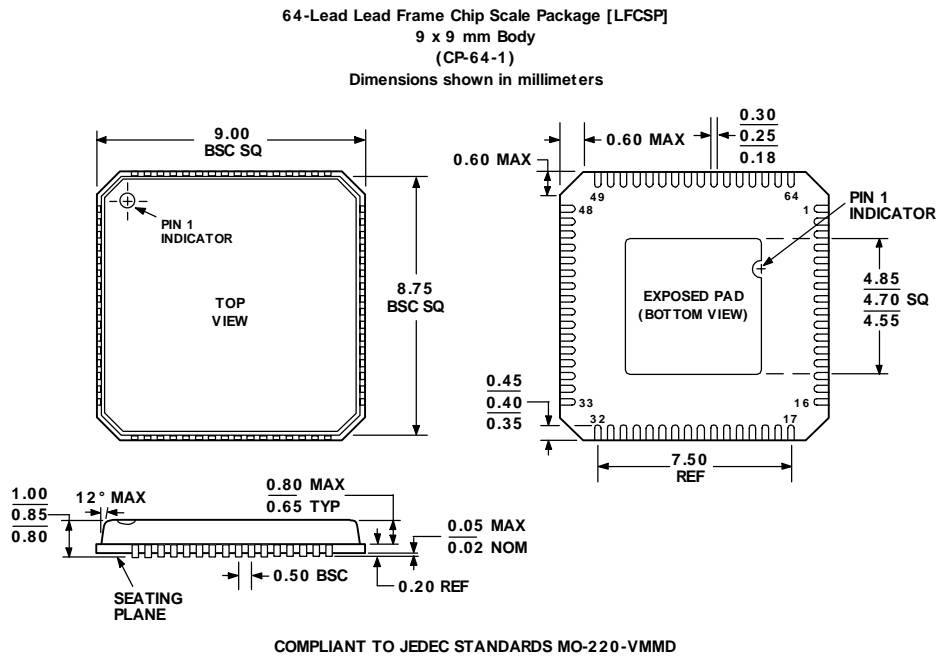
64-Lead Lead Frame Chip Scale Package [LFCSP] (CP-64-1)—Dimensions shown in millimetres
